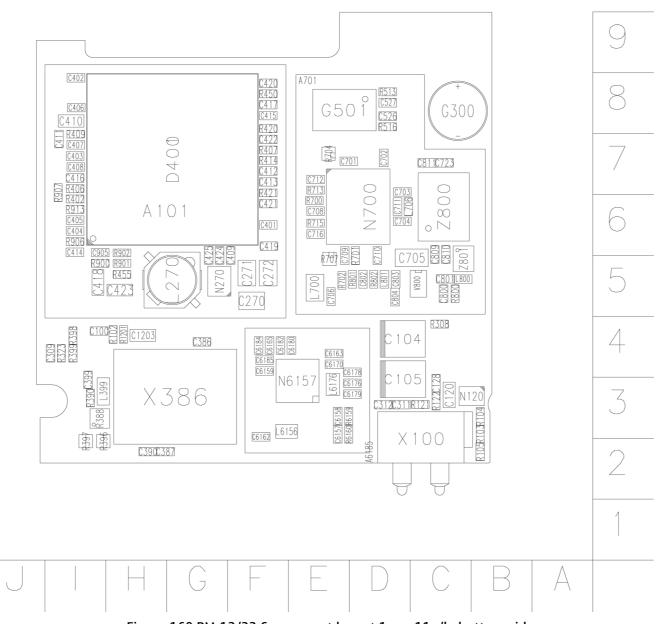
RM-13/33 Component layout 1eaa\_11a/b, bottom side
